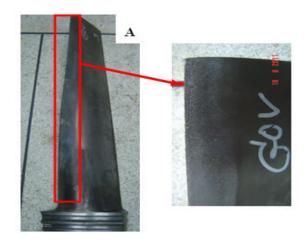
Steam turbine blade showing damage caused by wear along the edge of the blade
